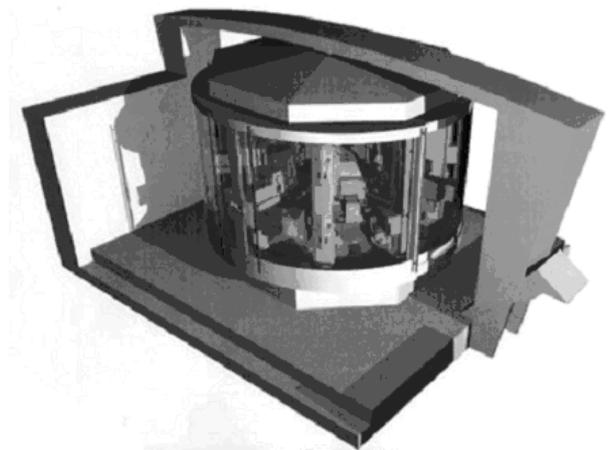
Large product: machine tool (from: Breiing, Mikron)
